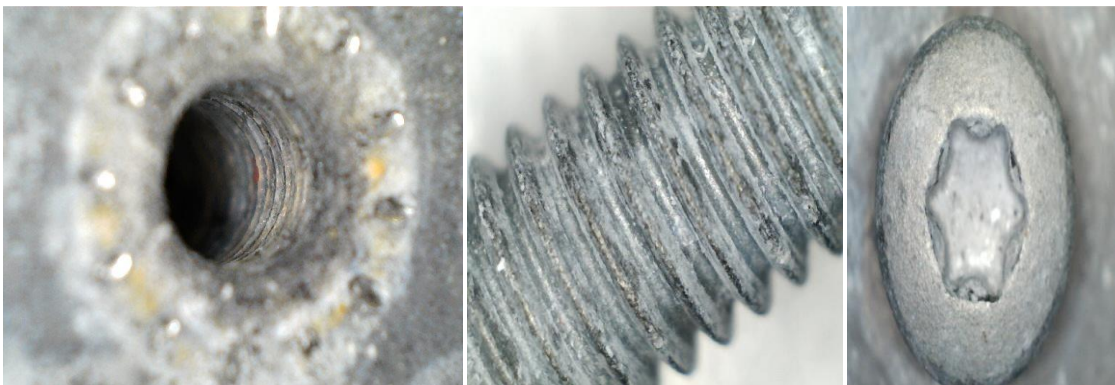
SUS304 Delta Tone, thread and head of the screw after salt fog test
